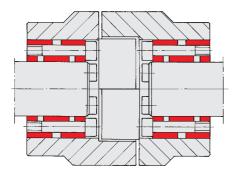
Jaw clutch fixture. No grooves, shaft shoulders etc. A reasonably priced but highly effective connection.
